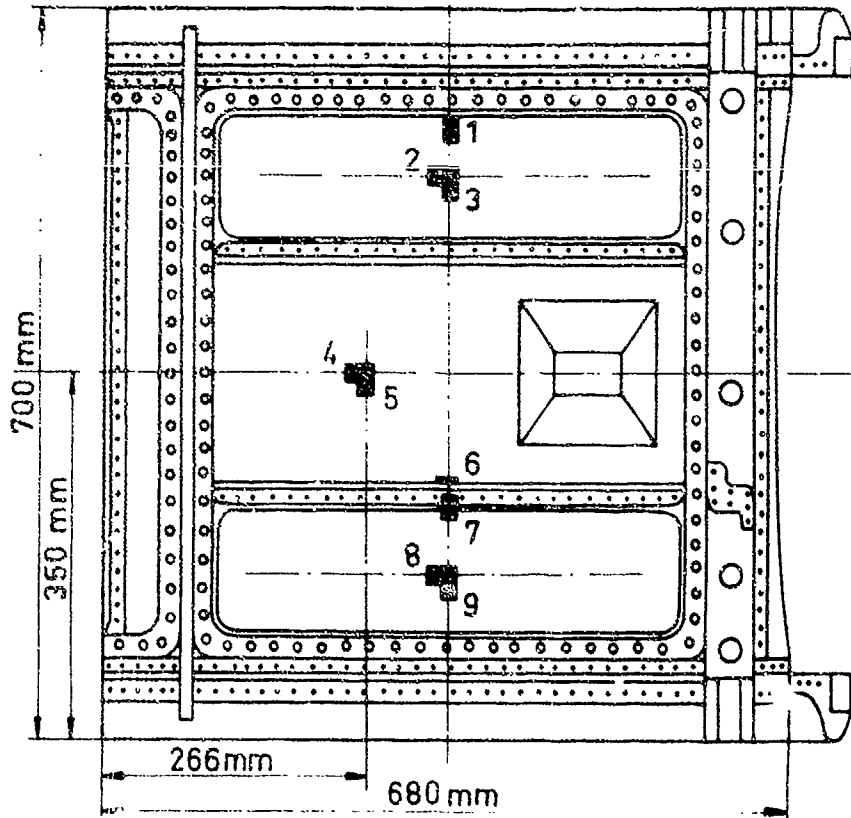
vAK 191 B : FUSELAGE LOWER PANEL : Strain gages positions
